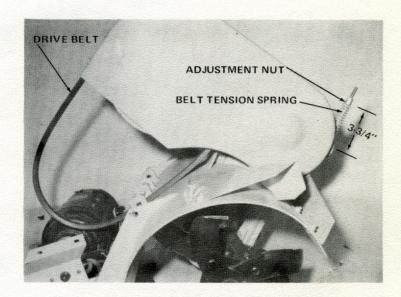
DRIVE BELT REPLACEMENT & ADJUSTMENT
